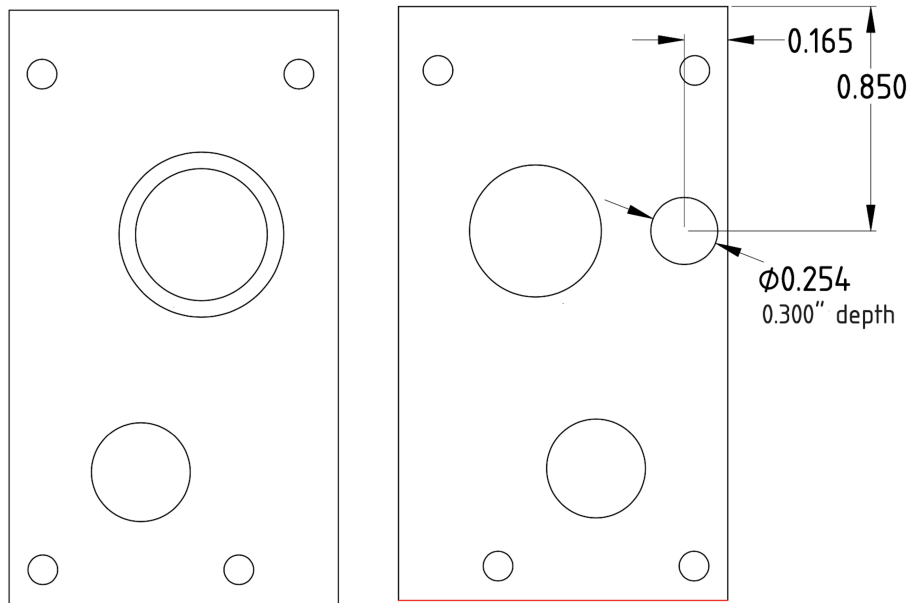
Engineering drawing of middle 6061 aluminum guide. The left shows the top, while right shows the bottom. Omitted dimensions are shared with Figure B.1. Red edge denotes shared edge between drawings. Units are in inches.
